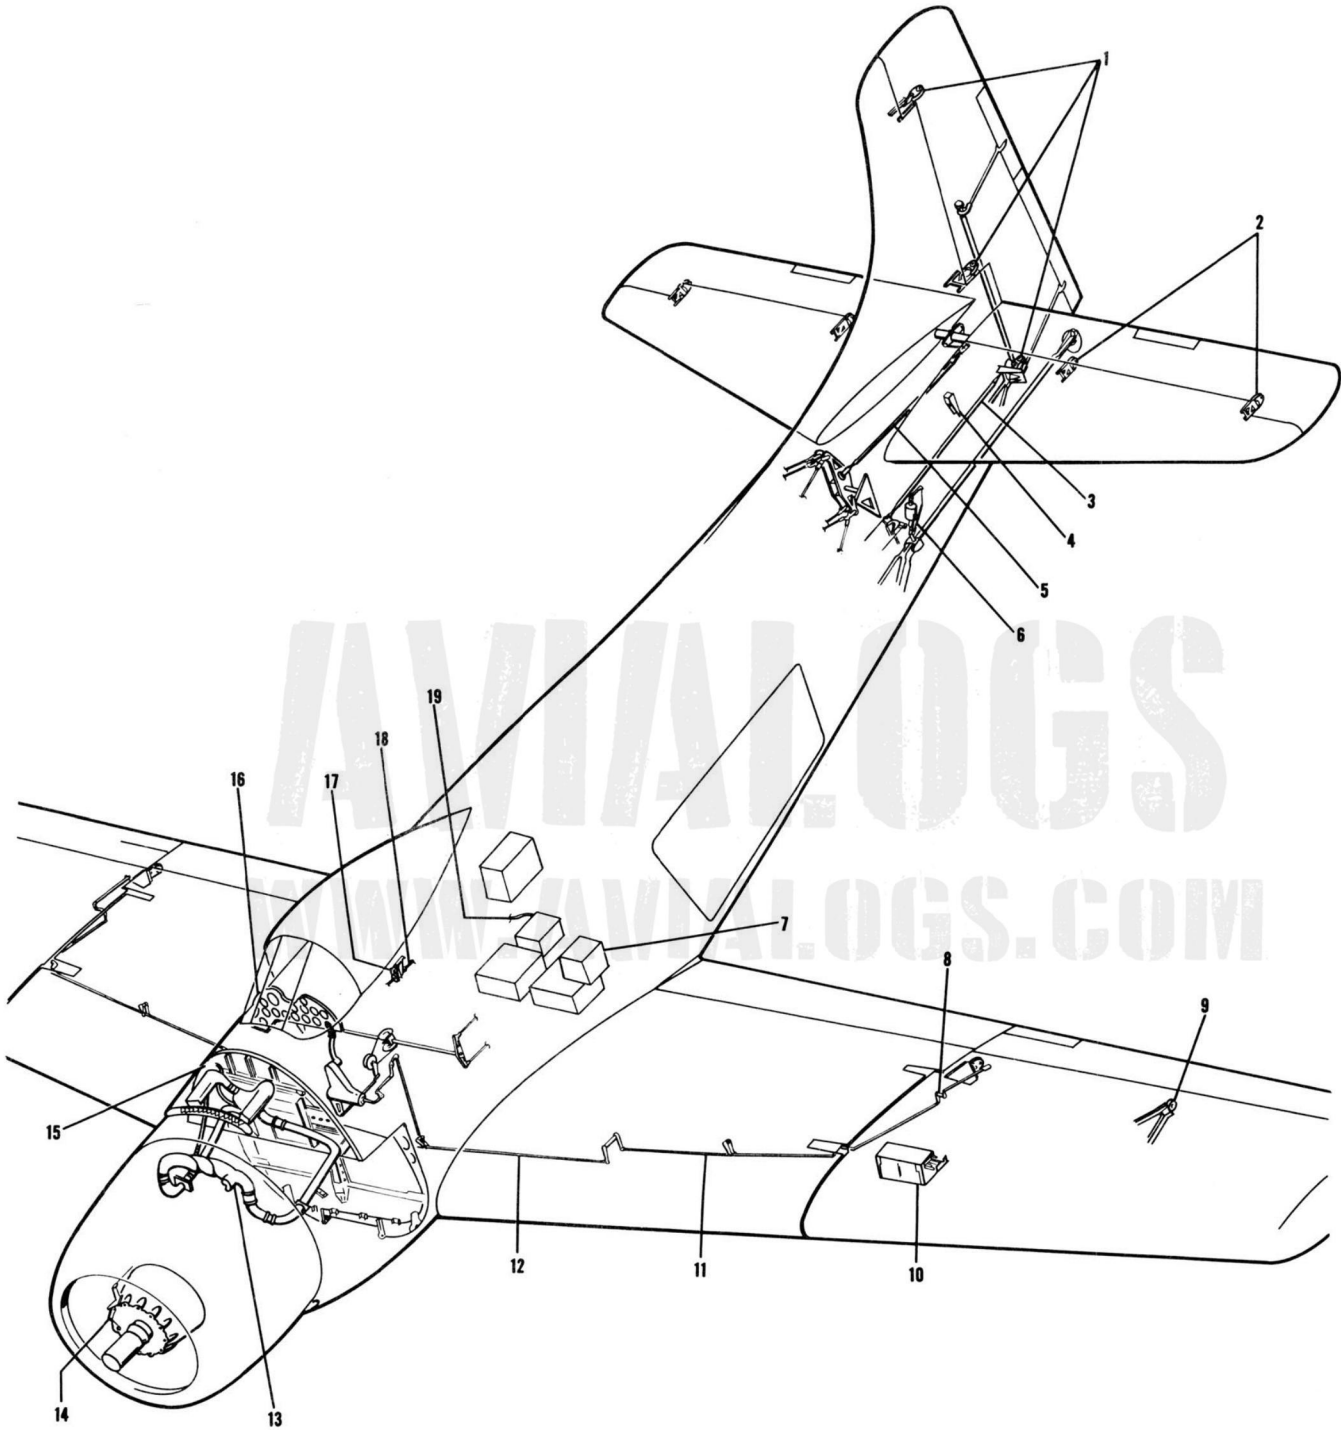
Dissimilar Metals Corrosion Inspection Chart (Sheet 1)
